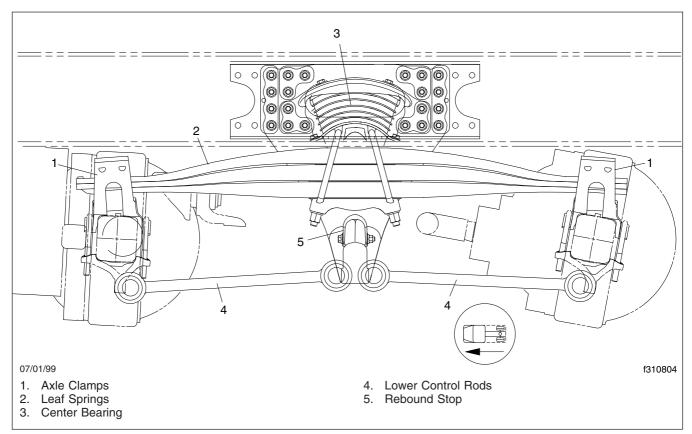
, TufTrac Suspension (46,000-pound [20 865-kilogram] version shown)
